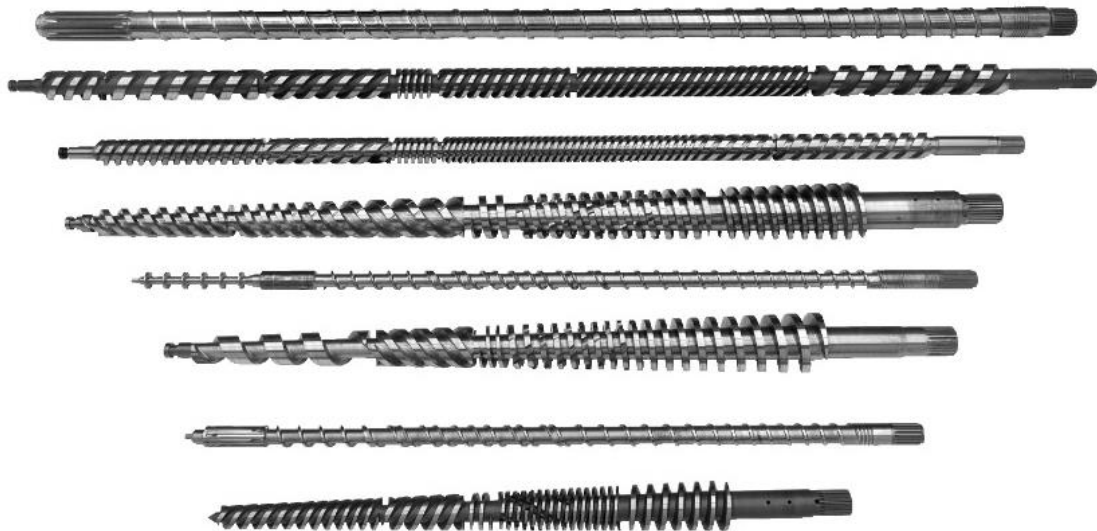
Extrusion Screws collection, (Extrusion Screws Machining, Danobat)
